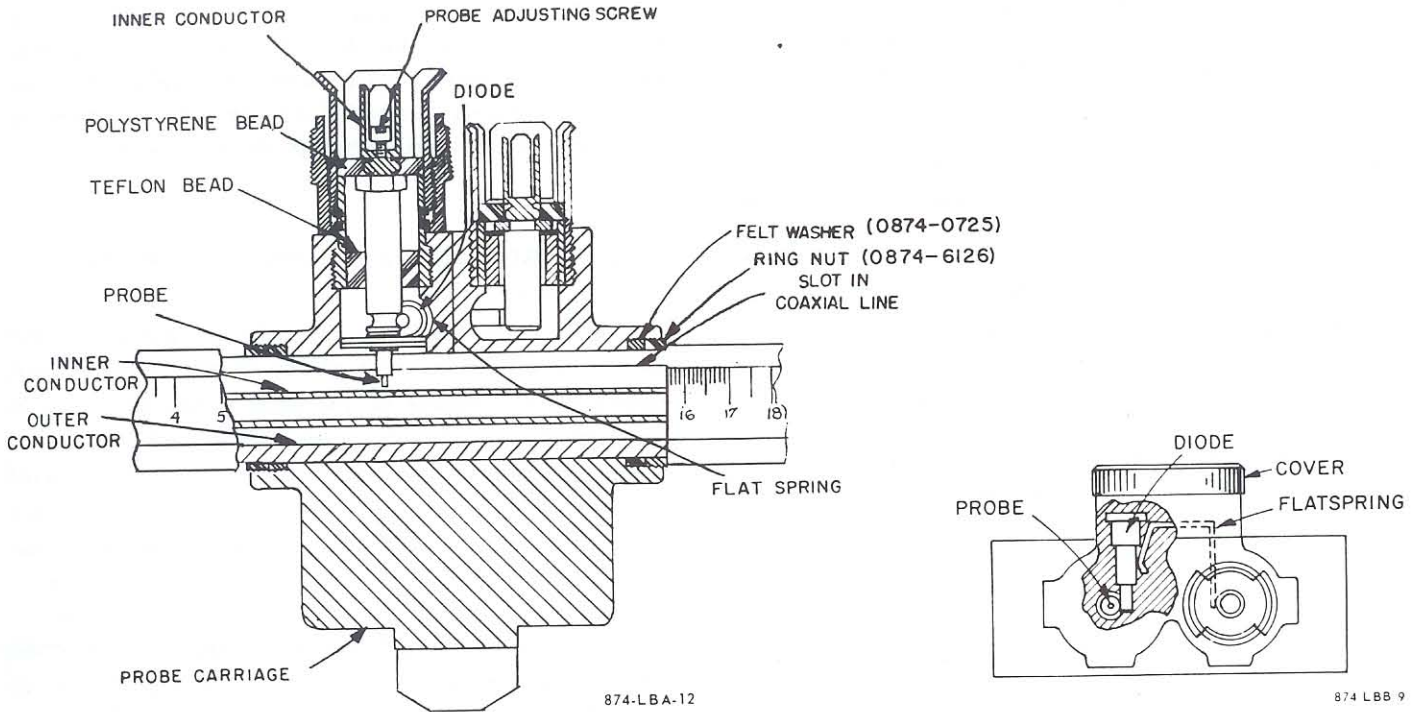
Cross-sectional views of the carriage on the Type 874-LBB Slotted Line, showing the diode mount and the adjustable probe.
